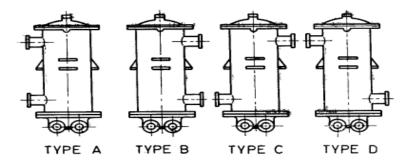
SUSPENDED MOUNTED (SM) TYPE HEAT EXCHANGERS
